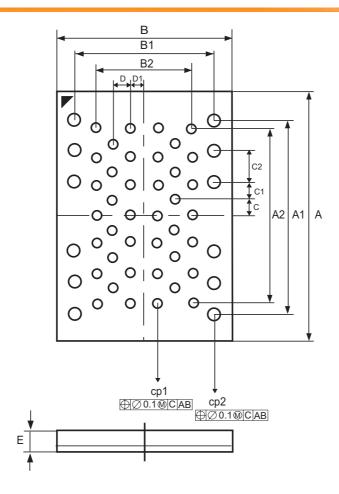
52-ULGA, 12 x 17mm, Package Outline (Top view through package)
